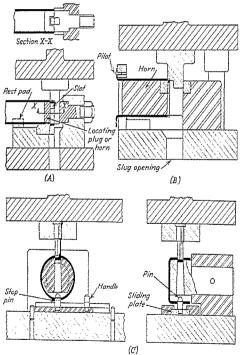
Horn dies (A) cutting two opposed notches in one stroke with only one punch; (B) notching in relation to hole in flange; (C) with movable gage pin to locate second hole.
